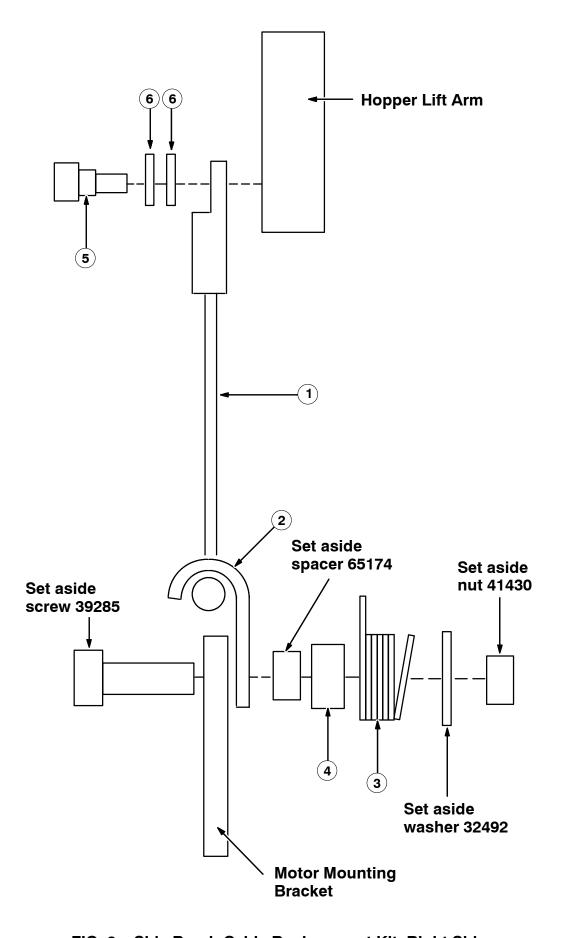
Side Brush Cable Replacement Kit, Right Side
